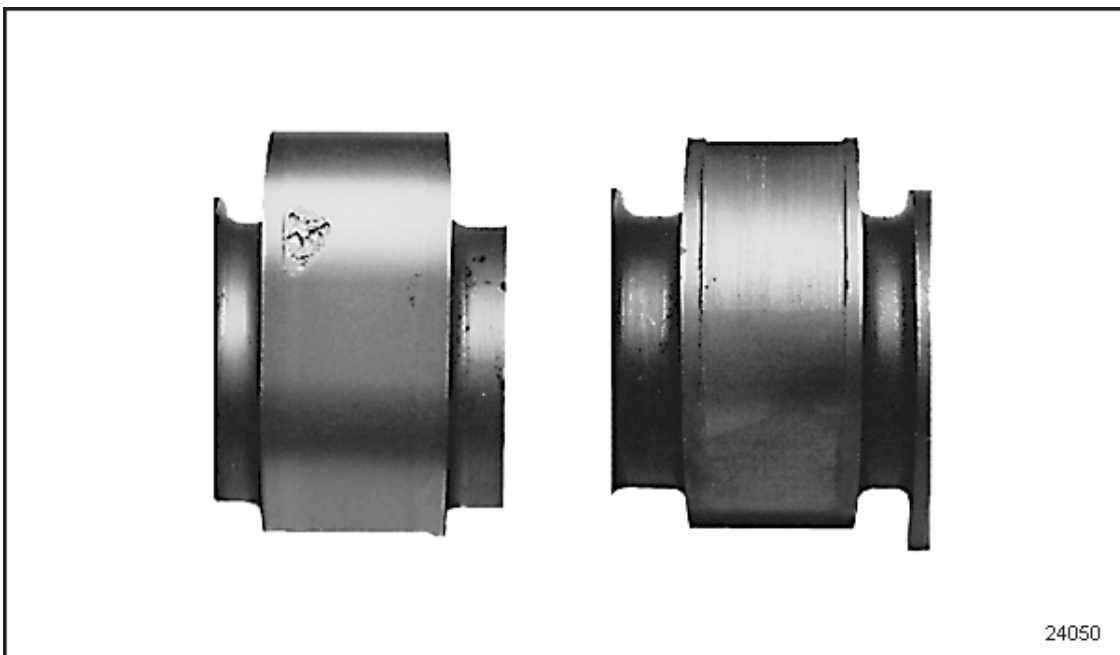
Camshafts Exhibiting Surface Pits on the Exhaust Lobes
